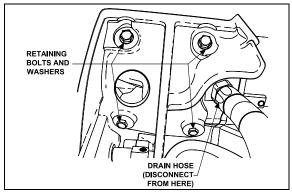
ALTERNATOR RETAINING BOLTS AND WASHERS 06350
